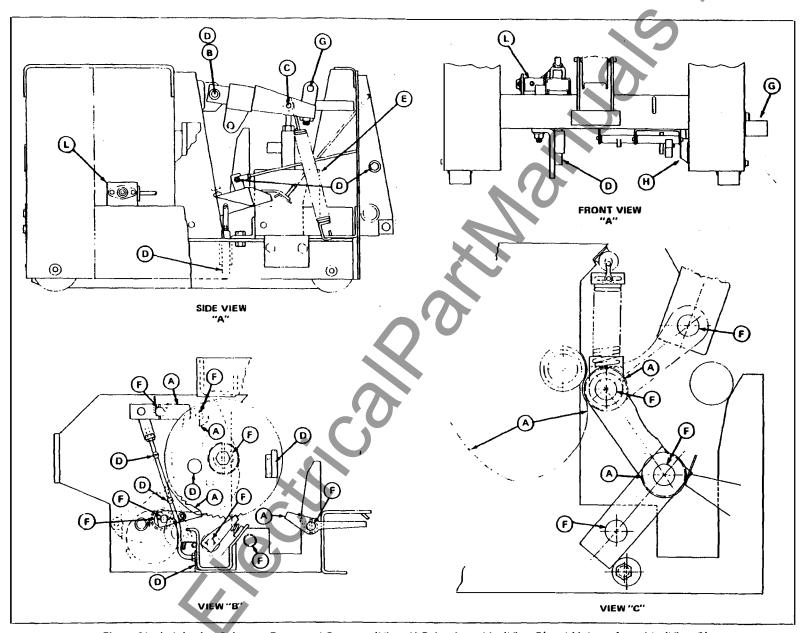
Lubrication Points on Frame and Operator (View A) Drive Assembly (View B) and Linkage Assembly (View C)
